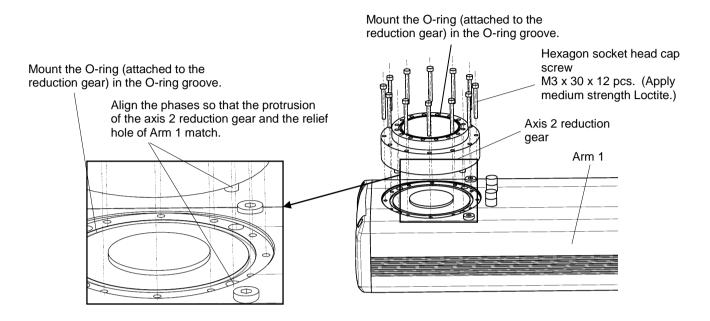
Mounting axis 2 reduction gear (KHL-500, KHL-600, KHL-700)
